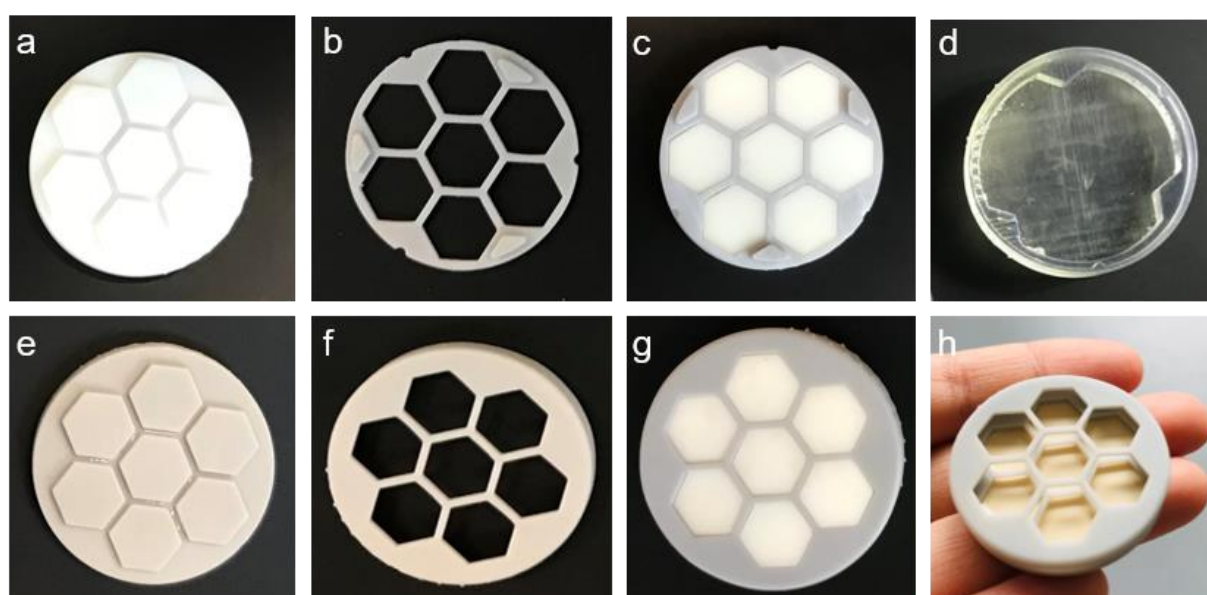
Prototyping of encapsulation device components. *a* Insert for islet holder. *b* Islet holder. *c* Fitting of islet holder on insert to test tolerances. *d* Skeleton *e* Insert for membrane holder. *f* Membrane holder. *g* Membrane holder fitted with insert. *h* Assembly of whole setup with oxygen disk.
